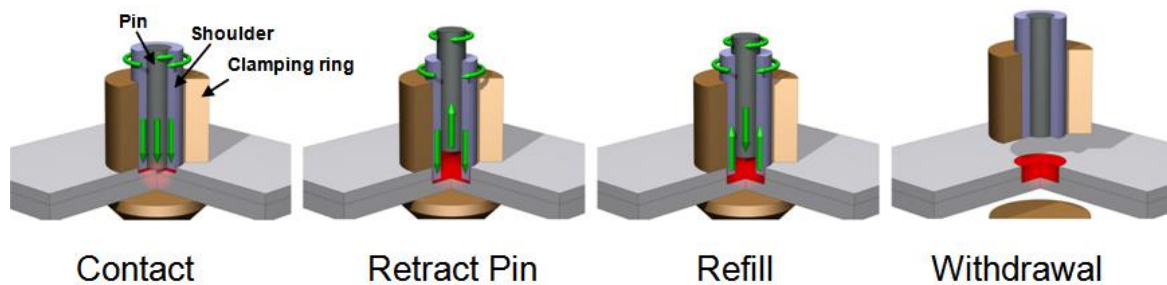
Schematic of different stages of process by RPS100 spot friction welding system [36]
